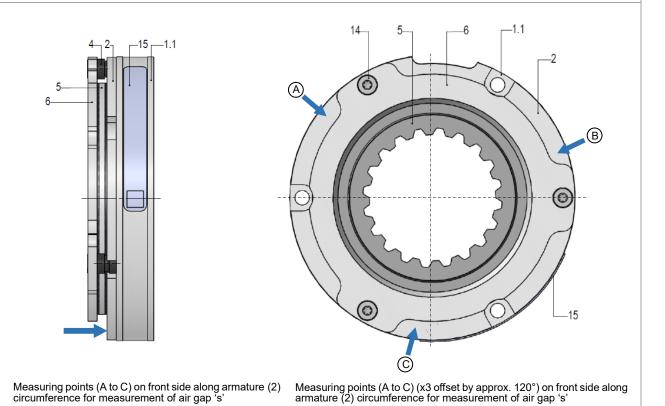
/3: Location of the measuring points (arrow marks) for measuring the air gap 's' of brake type SL 502..A00 (example), shown without hub (7)
